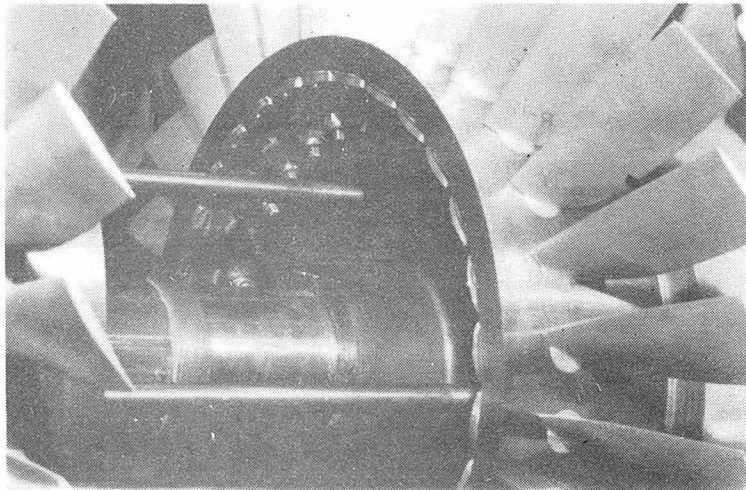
DETAIL OF ROTOR AND ROTOR BLADE FASTENING
